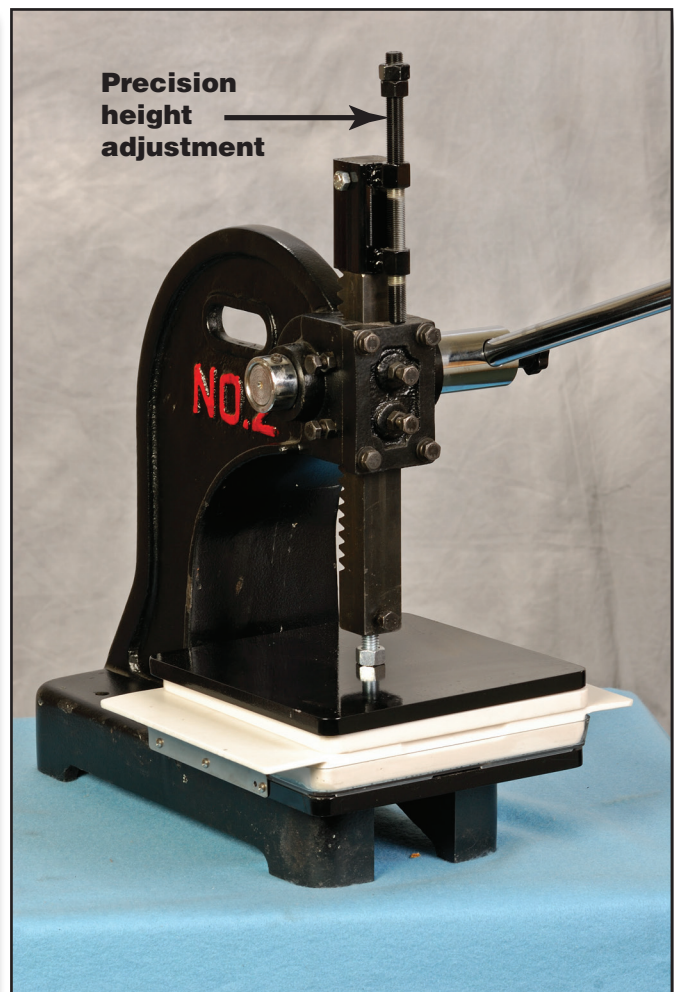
Modified arbor press with the prototype seed crusher assembly.
